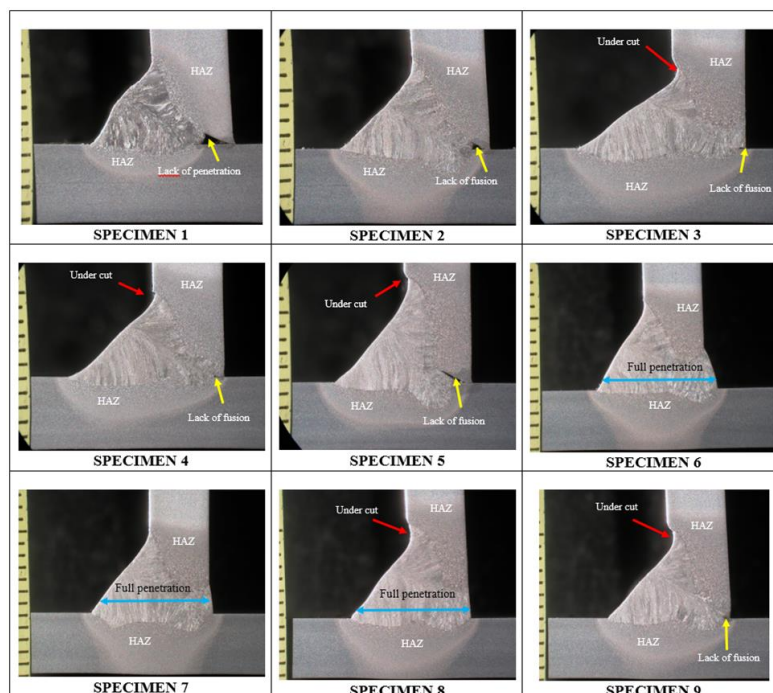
Full penetration fillet weld with test specimens showing a transverse view of macro-sections, possible defects and longitudinal throat thickness with the aid of optical microscopy.
